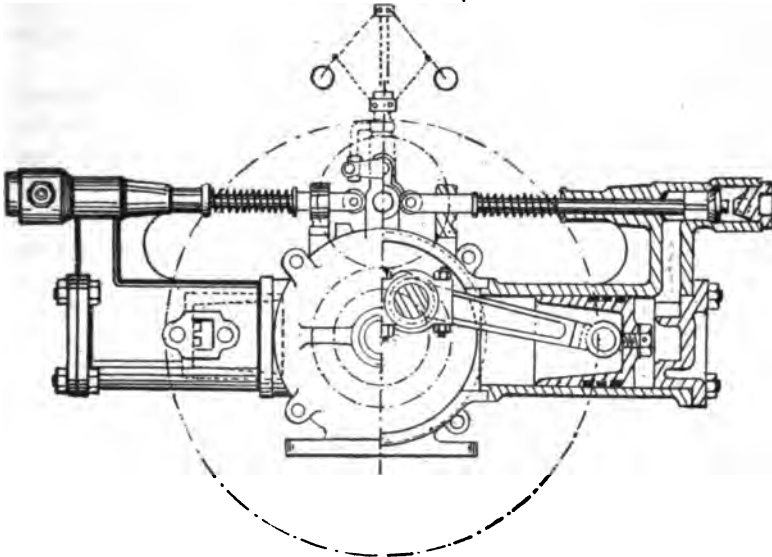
One Model of Serrpollet Single-acting Two-cylinder Engine. As may be seen, this engine, with cam-actuated poppet valves, centrifugal governor for regulating the cam movement, and large fly wheel, closely resembles gas engines of the double-opposed cylinder type.
